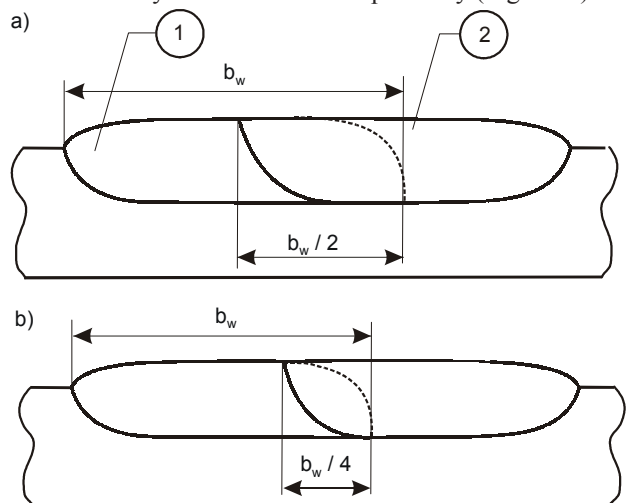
Overlapping of surfacing welds: b_w - weld width; 1 - first surfacing weld; 2 - second surfacing weld; a) 50 % overlapping of surfacing welds; b) 25 % overlapping of surfacing welds
